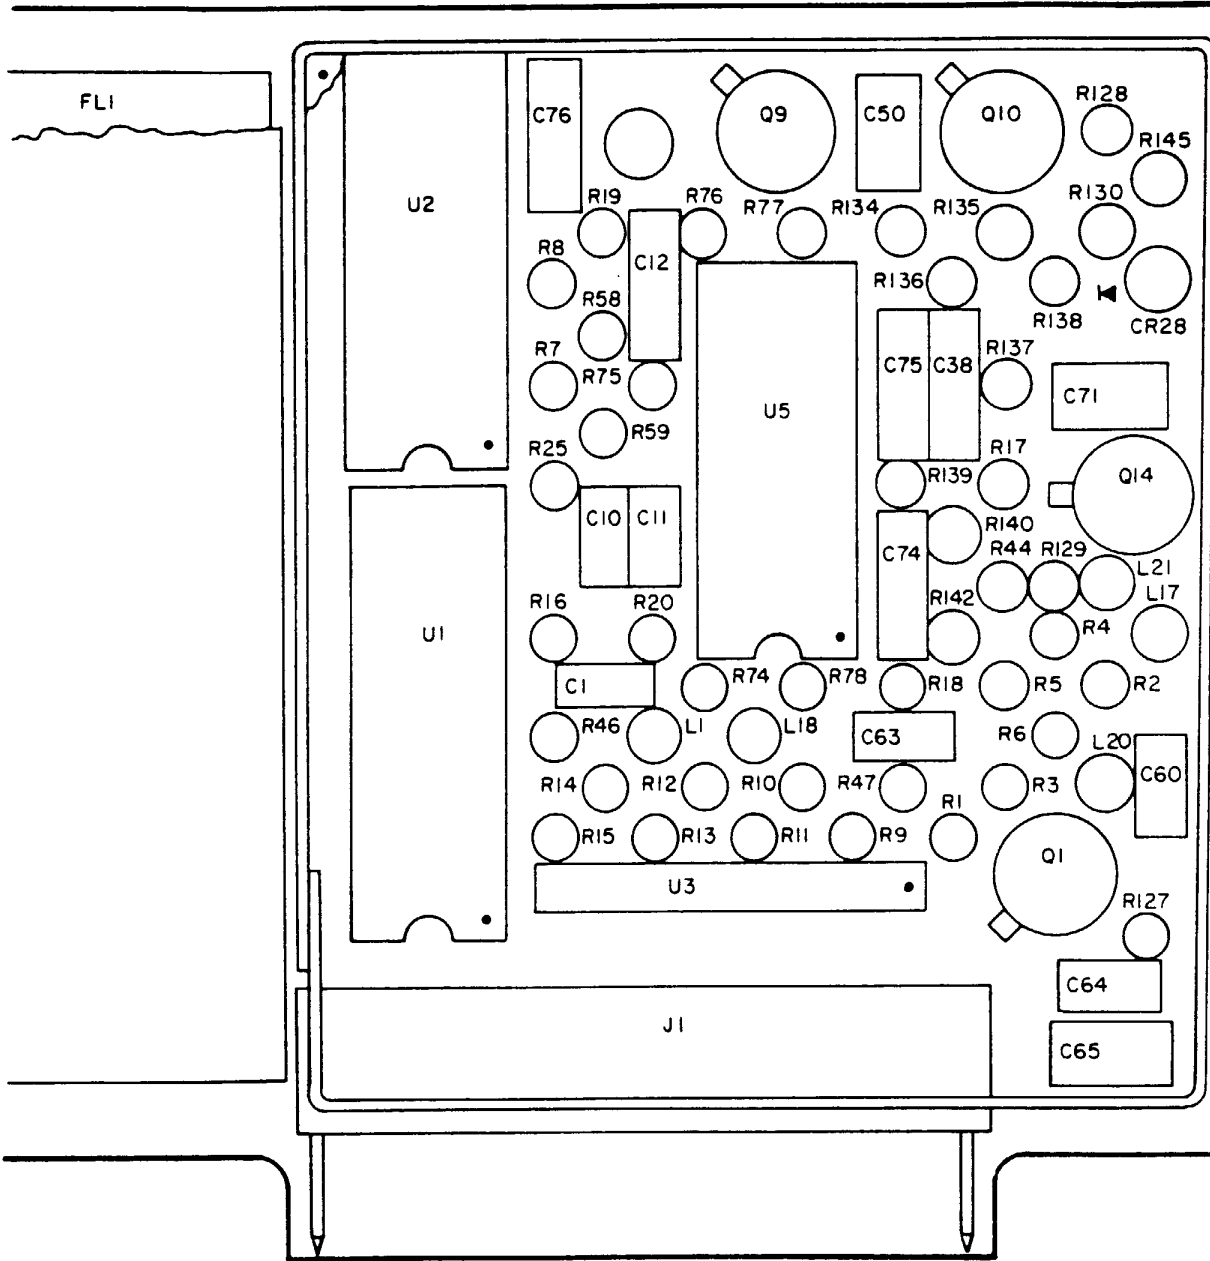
Synthesizer Assembly A1A1A6A1 Component and Test Point Location Diagram (Sheet 1 of 4)
